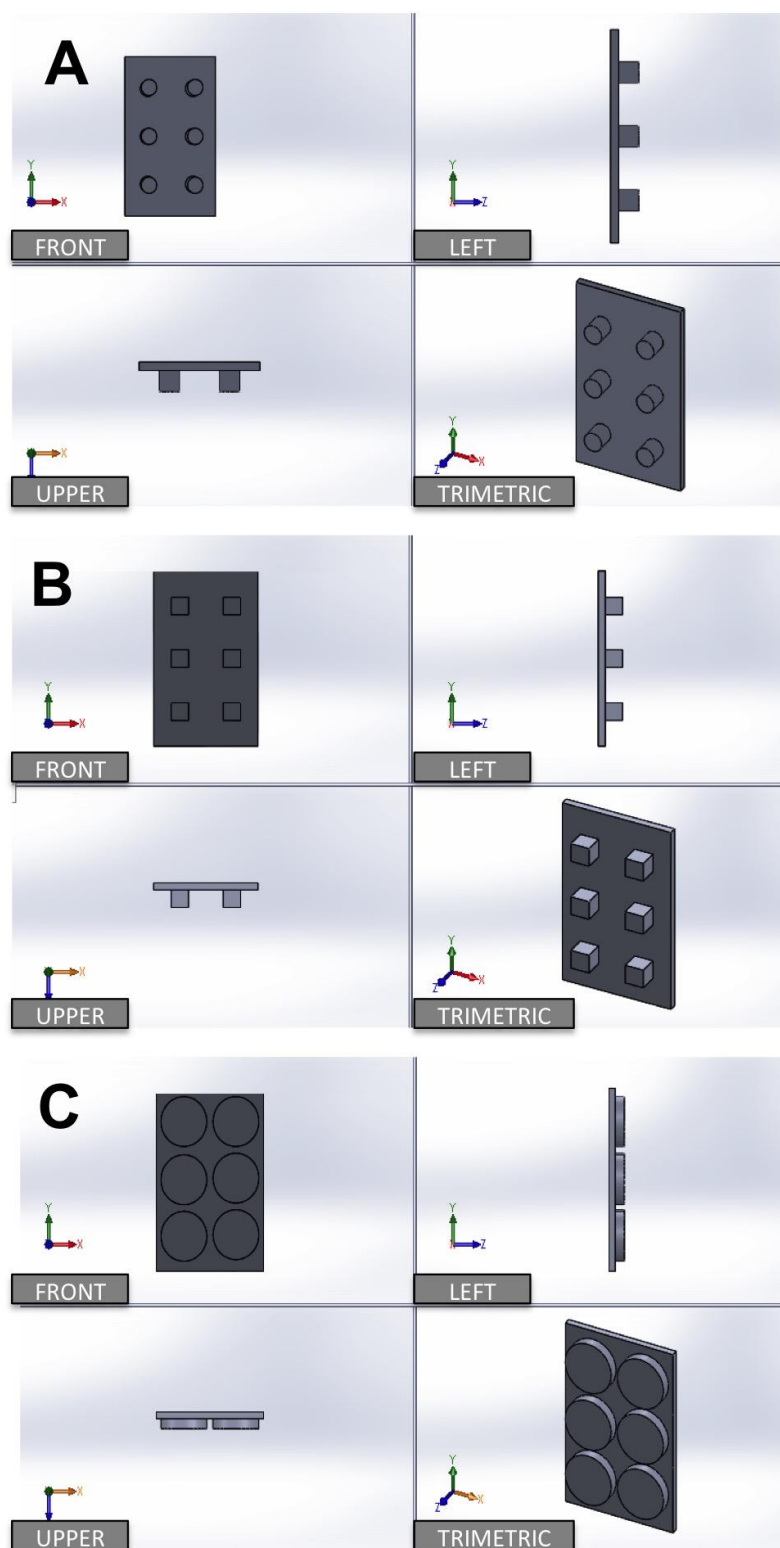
CAD drawings of 3D printed agarose mold templates in different perspective views. Molds comprised of (A) 6 cylinders (5mm in width, 5 mm in height), with edge length of 5 mm, (B) 6 cubes, 5mm in width and depth, and (C) 6 disks, 15 mm in width and 2 mm in height.
